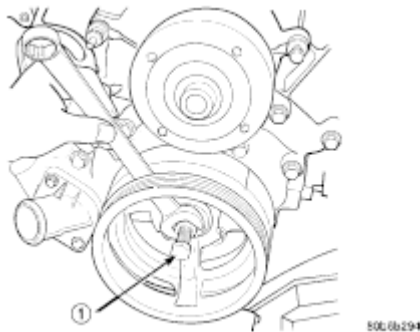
Pressing Damper Onto Crankshaft Using Special Tool 8512-A
